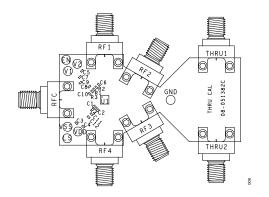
ADRF5048-EVALZ Evaluation Board Assembly Diagram
